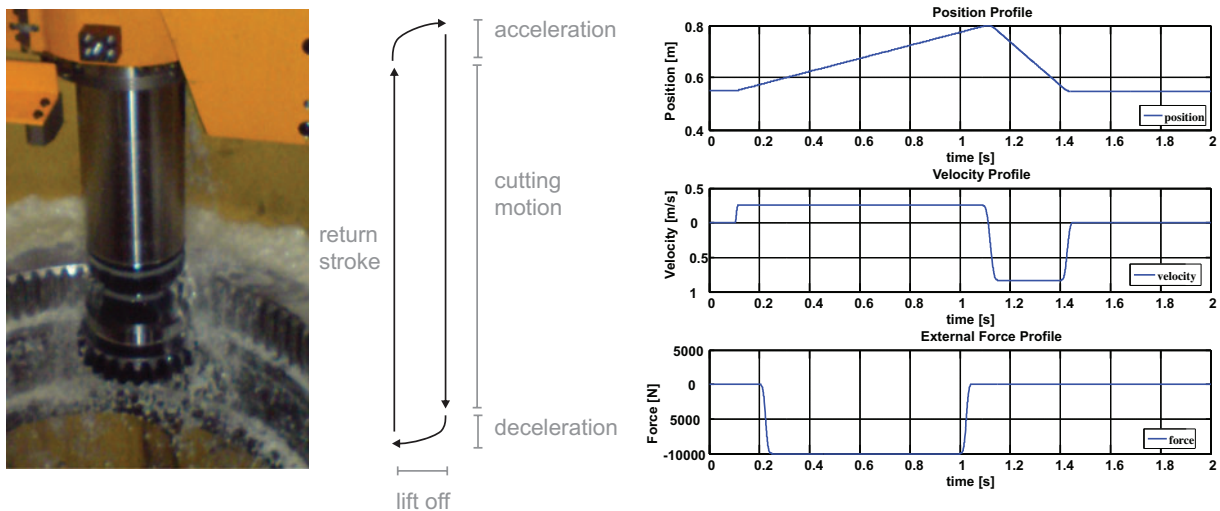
(a) Gear shaping spindle with gear shaped cutter cutting internal gear. (b) Typical load profile during rough cutting.
